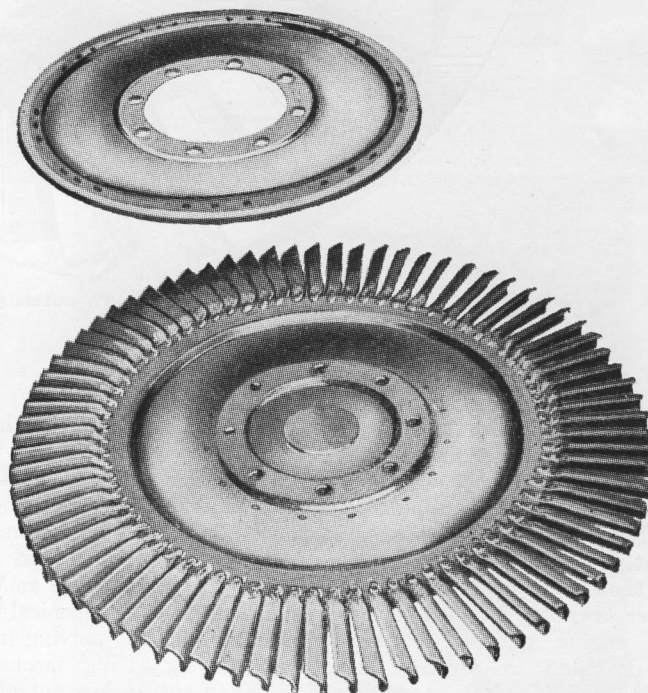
Turbine wheel with blades attached. A sheet-metal disk is applied to each side of the wheel to guide cooling air to the blades.
